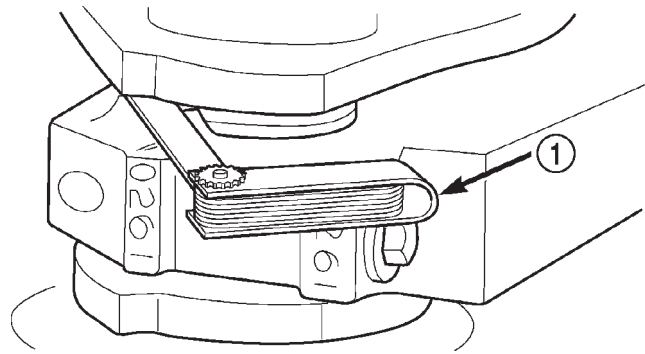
Side Clearance between Connecting Rod/Crankshaft
